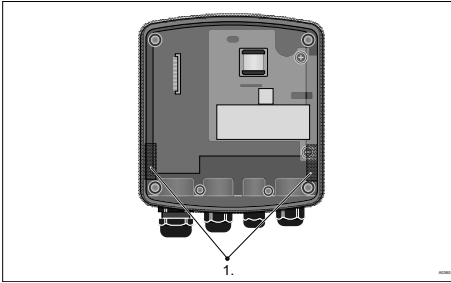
Fitting the profile seal on the lower part of the controller housing
